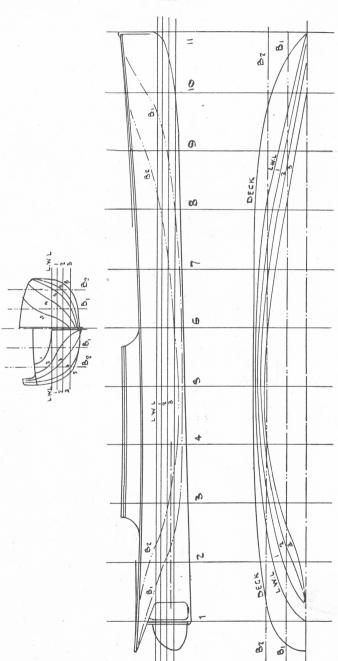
SHEER DRAUGHT HARBOUR FIRE BOAT.
